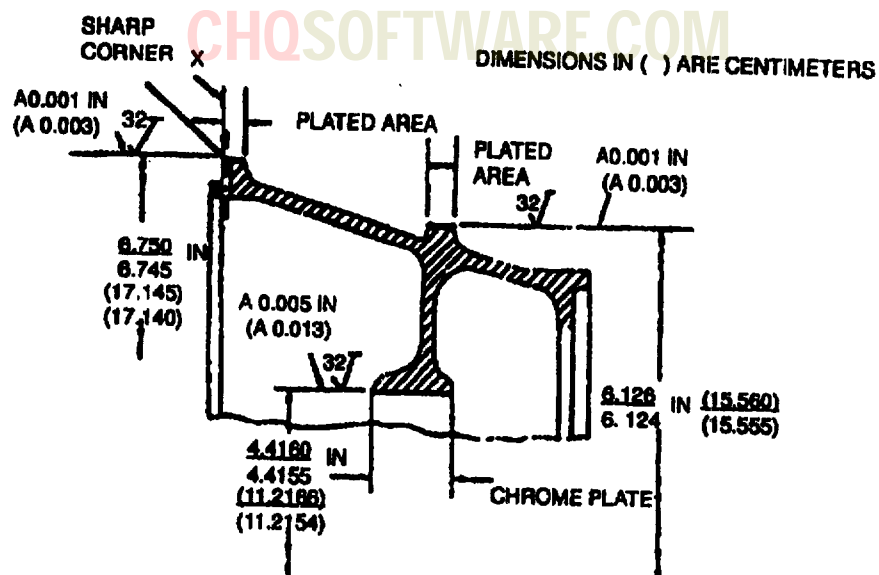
Chrome Plating - Fifth Stage Compressor Rotor Spacer (T53-L-15, -701).
